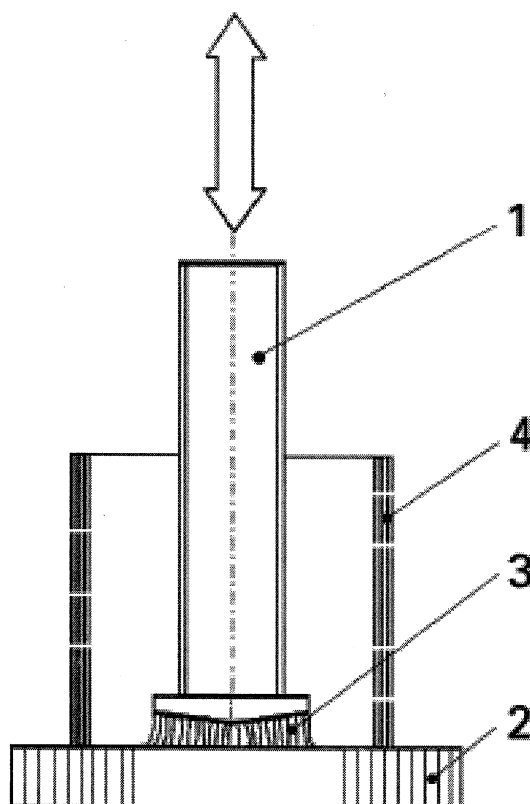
Capacitor discharge drawn-arc stud welding
